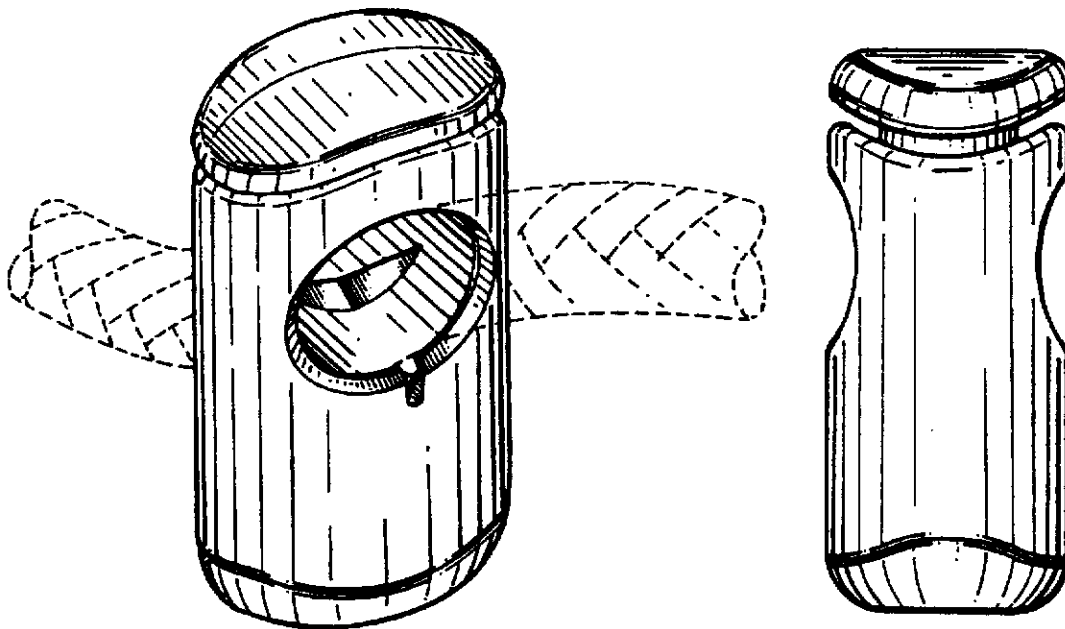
is a top, front, and left side perspective view of a cord lock showing my new design, the fragmentary broken-line disclosure of a cord being for illustrative purposes only and forming no part of the claimed design;
